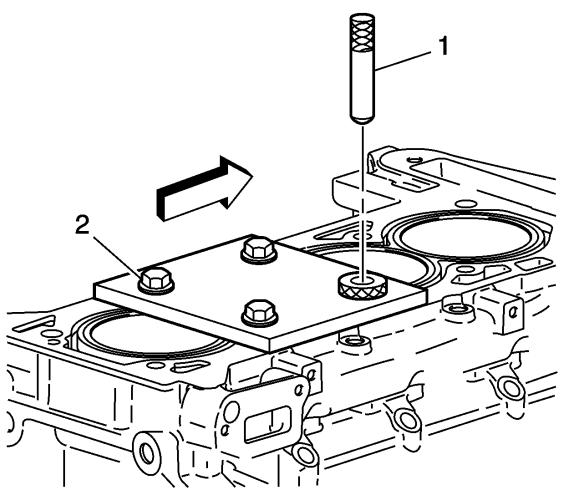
Installing Fixture Plate, Bolts, & Bushing Courtesy of GENERAL MOTORS CORP.
